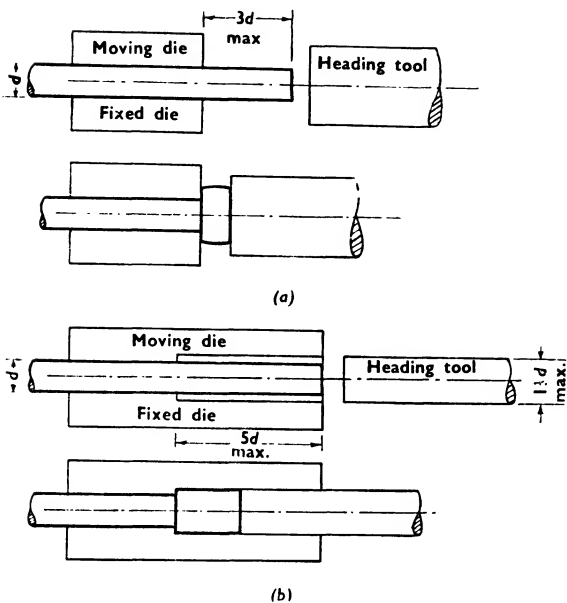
B. UPSETTING DIES USED IN A FORGING MACHINE
